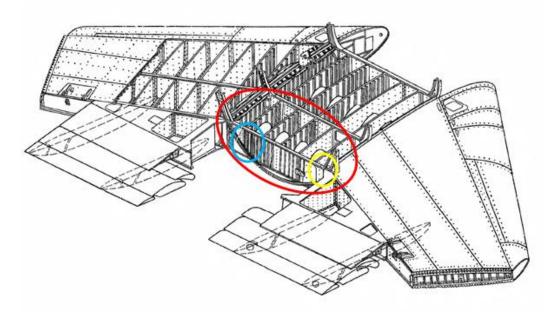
The center wing box of TU-154M. Highlighted in red, the fuel box no.1.
